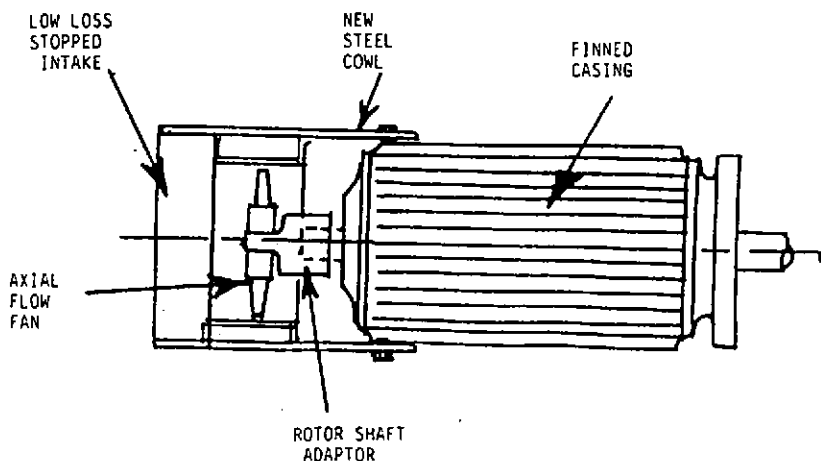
SKETCH OF TOTALLY ENCLOSED FAN COOLED INDUCTION MOTOR FITTED WITH HIGH EFFICIENCY AXIAL FLOW FAN.
